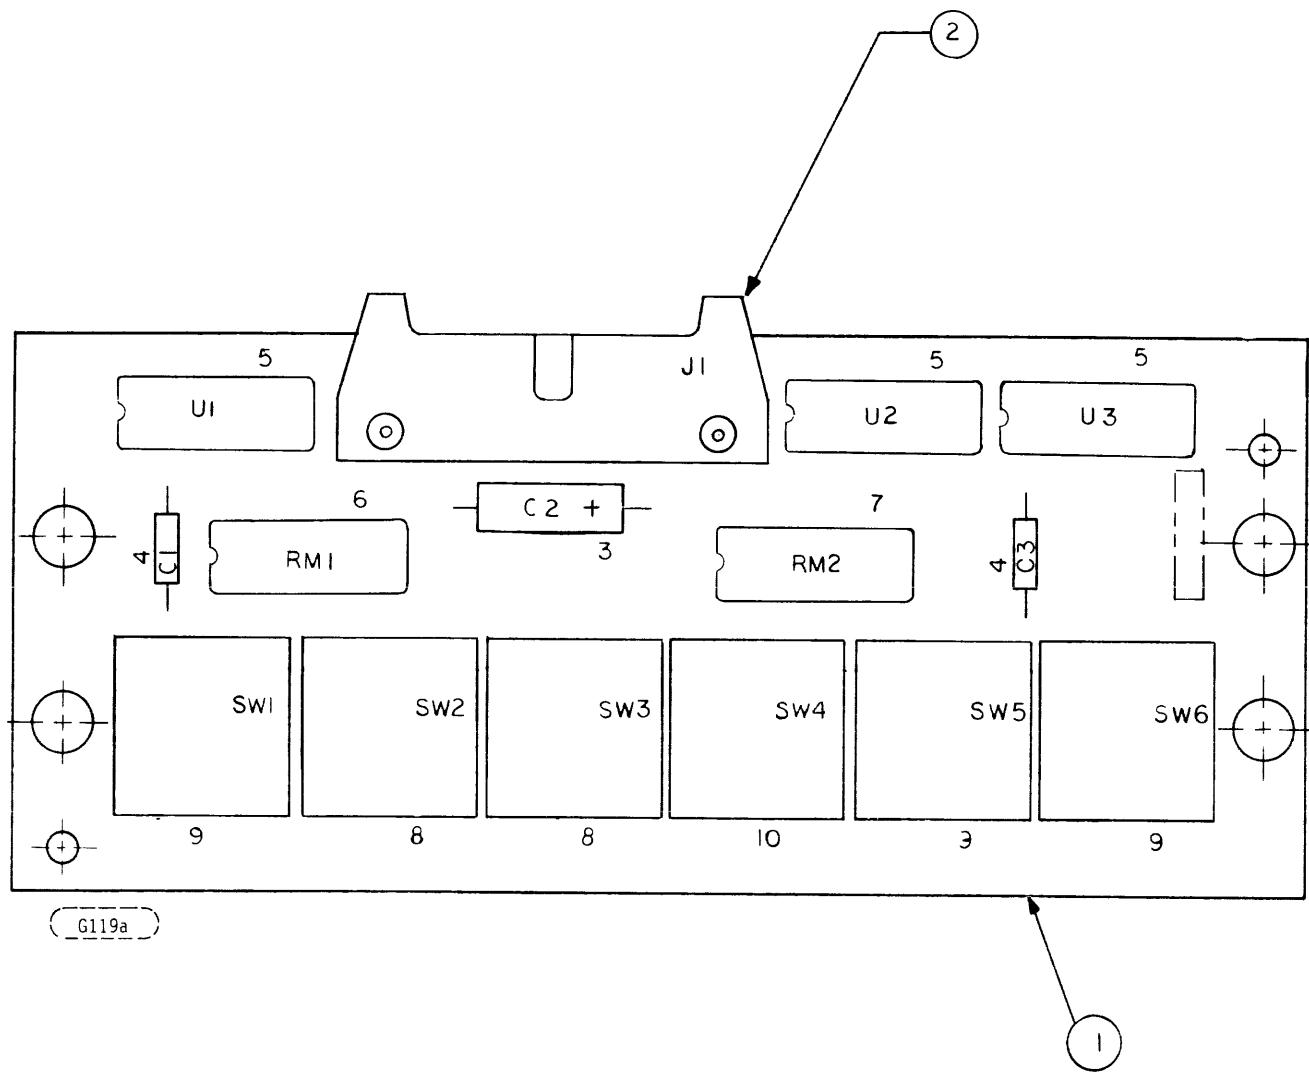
SWITCH BD ASM (SHEET 1 OF 3)
